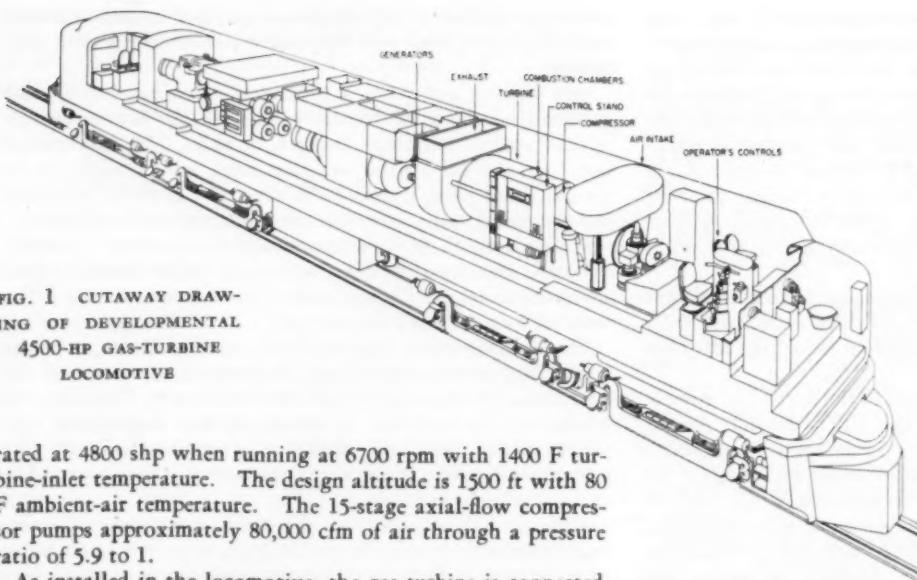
CUTAWAY DRAWING OF DEVELOPMENTAL 4500-HP GAS-TURBINE LOCOMOTIVE
